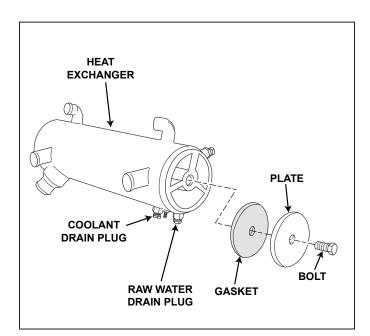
Heat Exchanger and End Plate Removal (Typical)
